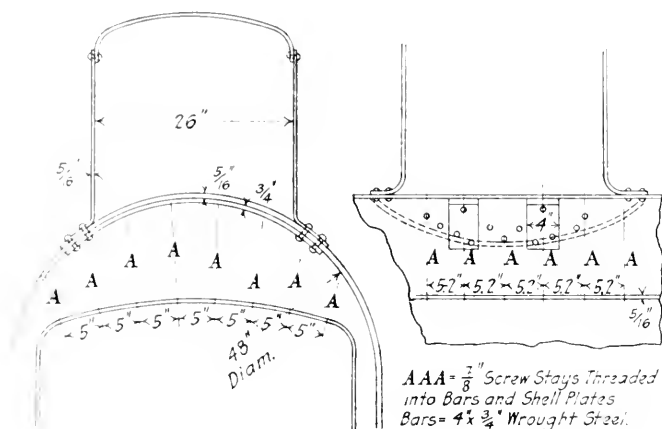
PROPOSED METHOD OF REINFORCING NEUTRAL SHEET UNDER DOME FOR SUPPORT OF CROWN SHEET
